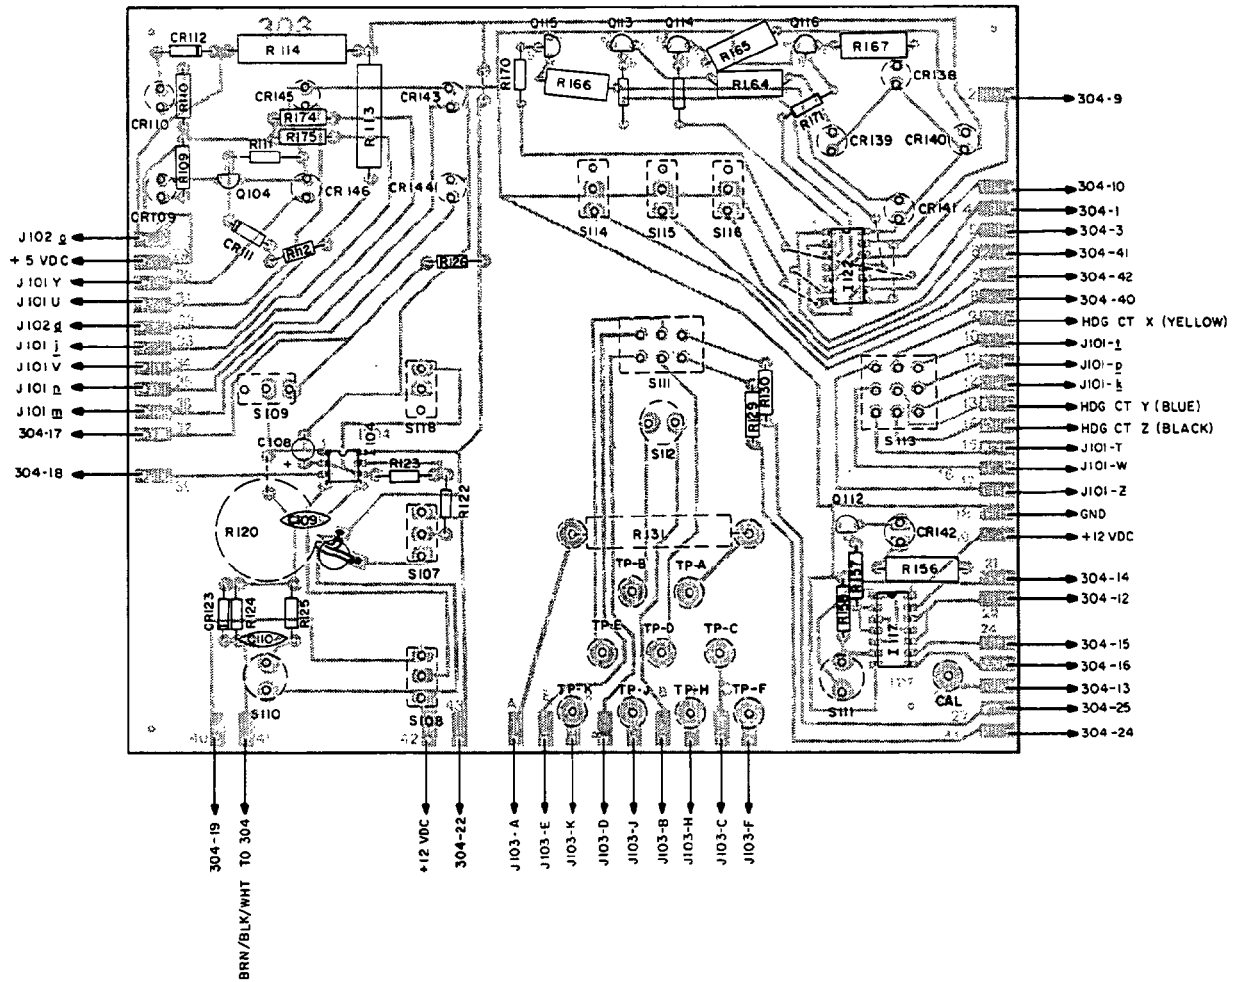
P.C. BOARD ASSEMBLY, BOARD 303, DRAWING (Dwg. 300-05987-0000 Rev. 0)
